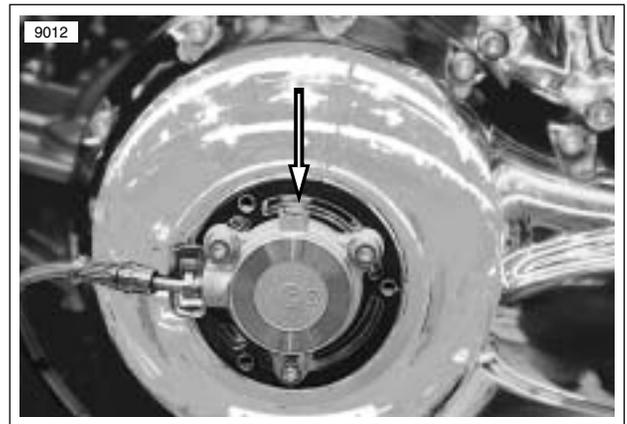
Secondary Clutch Actuator Bleed Screw
